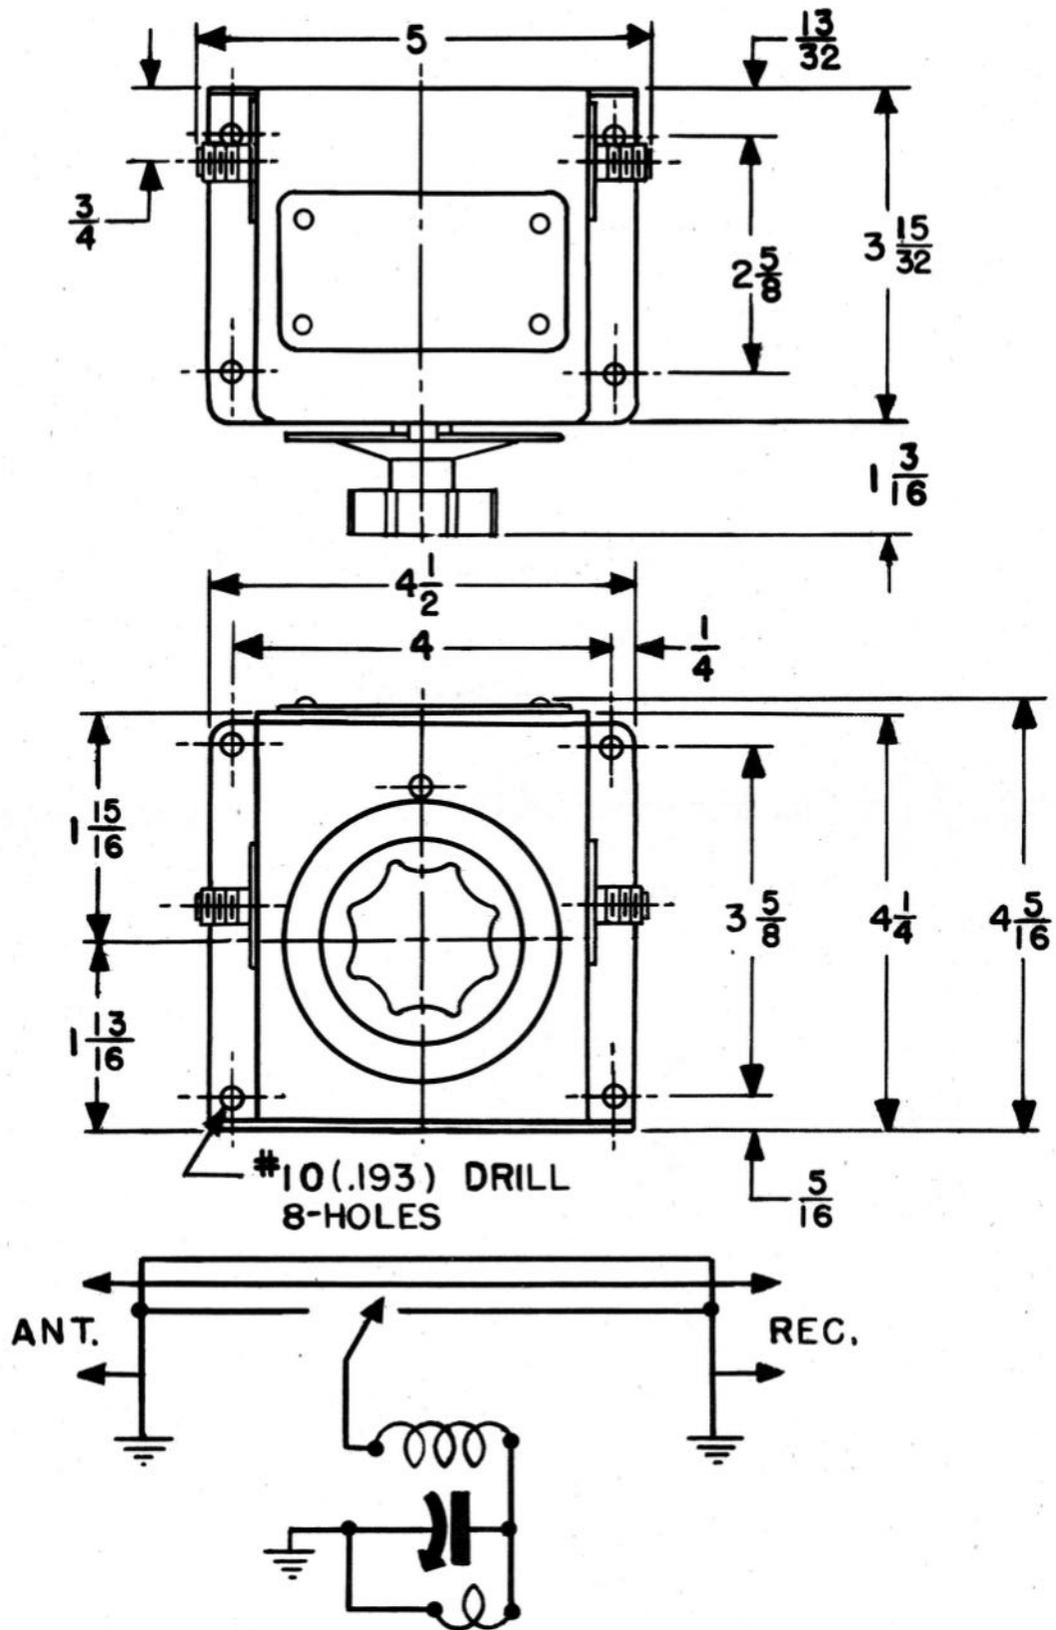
Wave Trap F-19/UPR, Outline Dimensional and Schematic.
